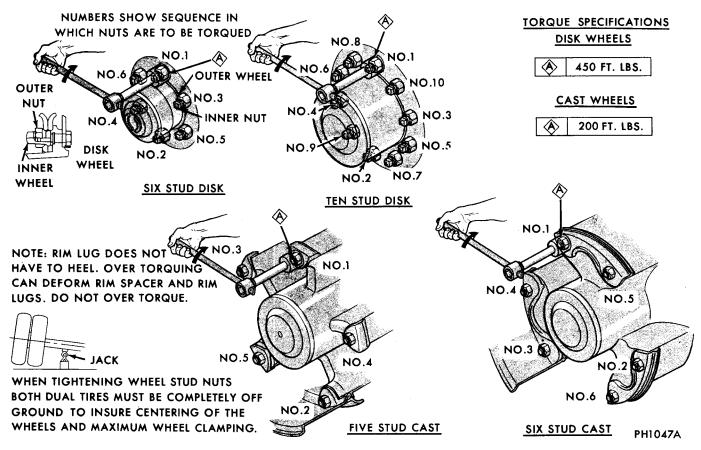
Wheel Tightening-D500, D600, S600, S700, D800
